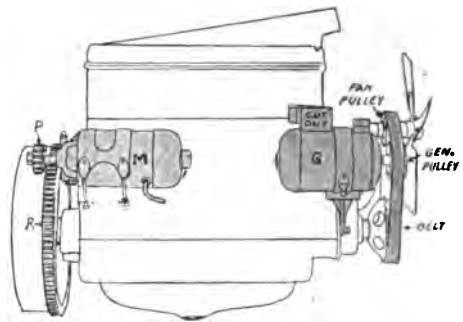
Generator driven by belt which drives the fan. Starting motor is the "automatic electro magnetic pinion shaft" drives through fly wheel. This system would be termed a "three unit system."
